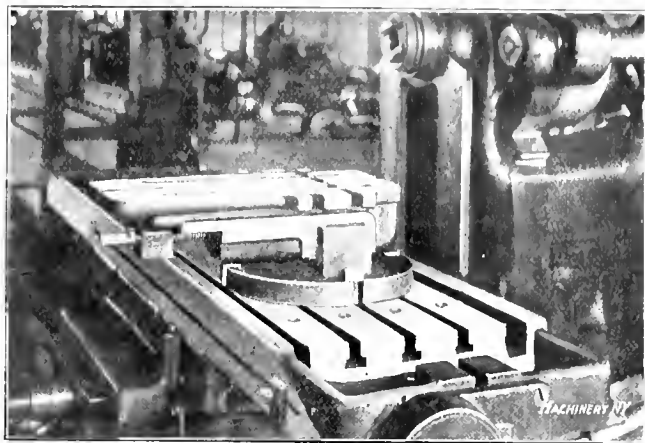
Fixture for Holding Milling Machine Vises while slotting them
